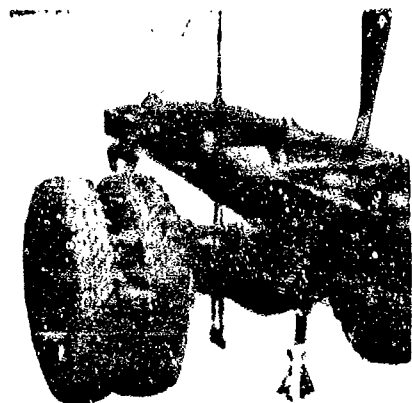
Separating the rear axle and frame of ZIL-130 motor vehicle
